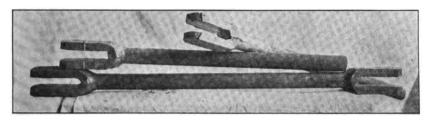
SEVERAL FINISHED RODS SHOWING PERFECT WELDS
